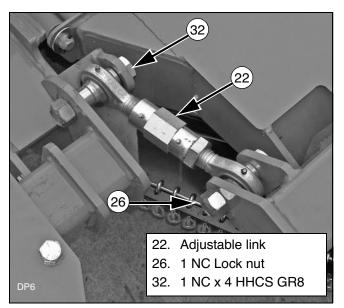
Right Wing Wheel Yoke Adjustment Link Installed
